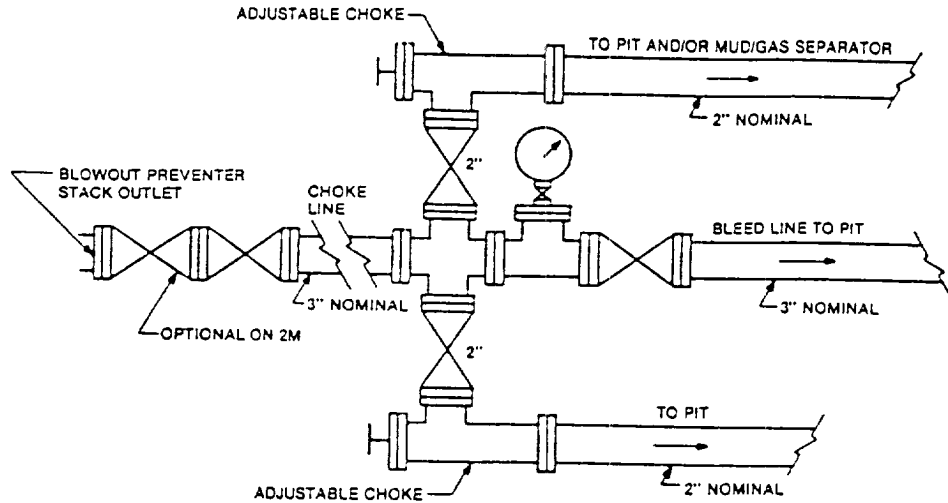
Typical choke manifold assembly for 2M and 3M rated working pressure service — surface installation.
